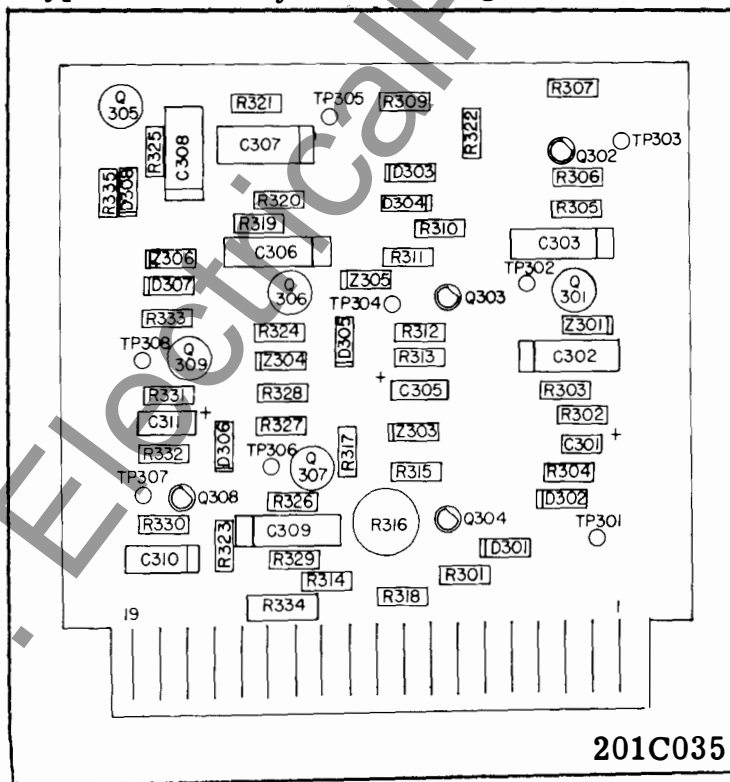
Component Location of the Output Board for the Type STU Relay.
